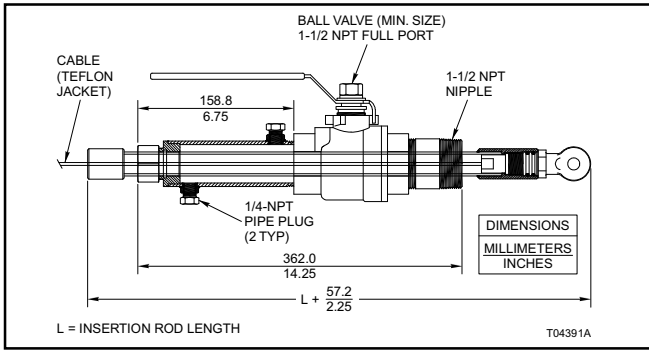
Hot Tap Sensor with Wrench Tight Compression Fitting
